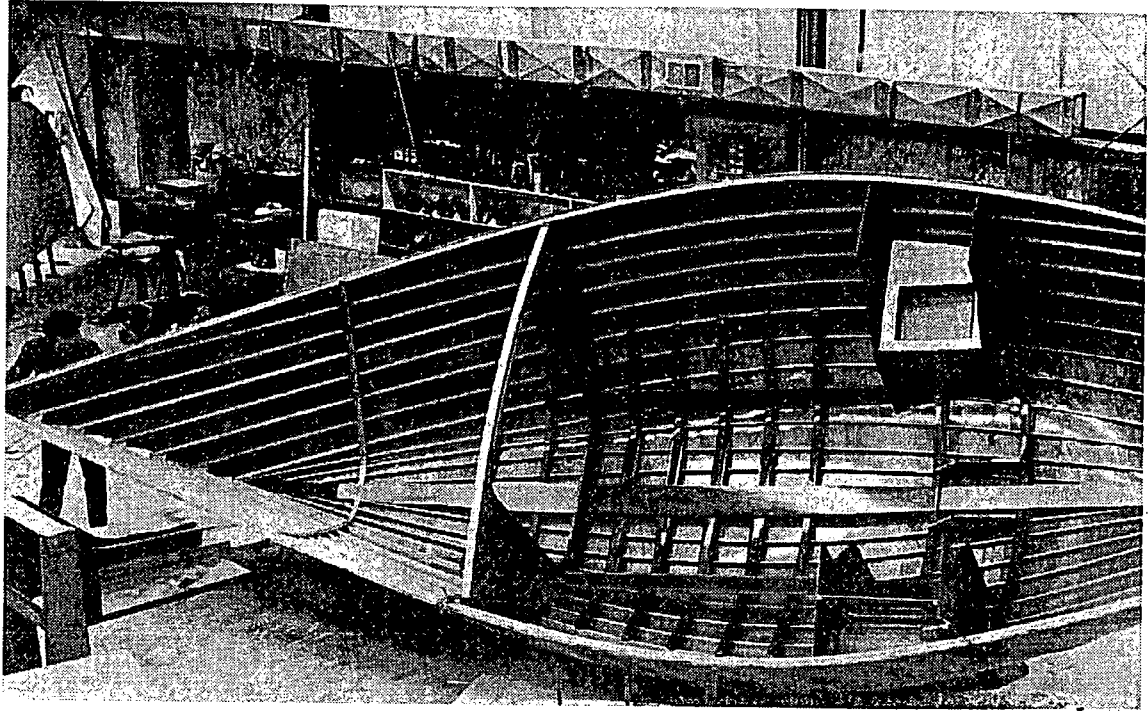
The completed hull is being rolled over. Note the heavy resin coating of all the interior parts.
